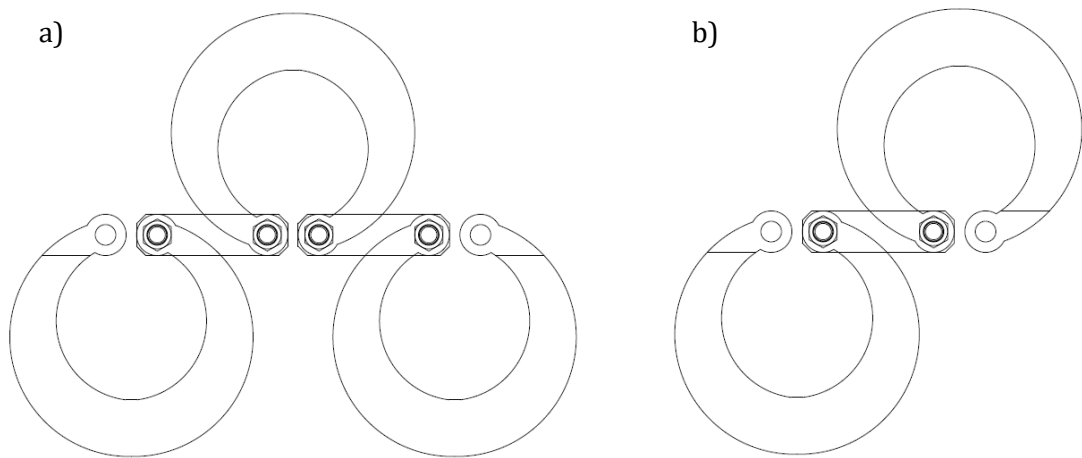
Sketch of brake elements; a) Type 1 used for upper and lower bearing rope and b) Type 2 used for intermediate bearing ropes
